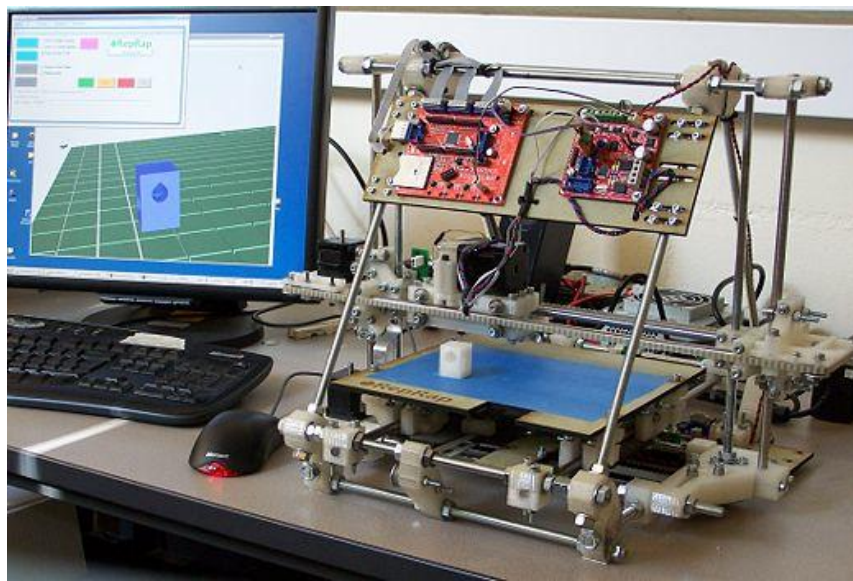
An example of a current RepRap machine. All the white plastic parts can be manufactured by the machine itself.
